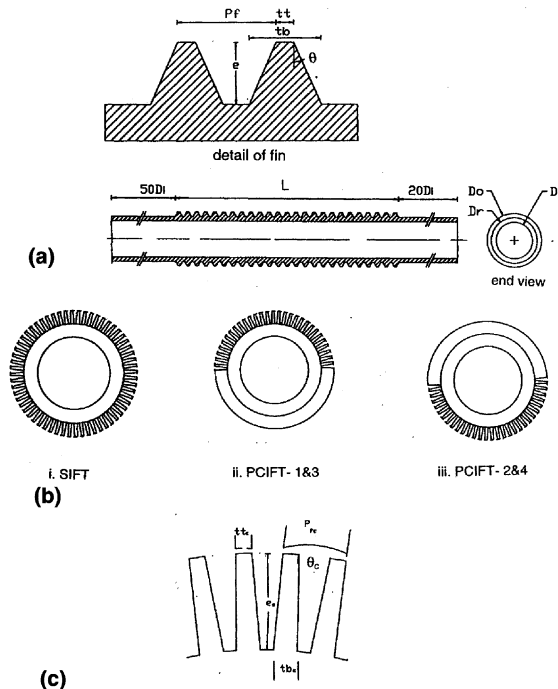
Test-section geometry: (a) details of a circular integral fin tube; (b) end views; (c) spine.
